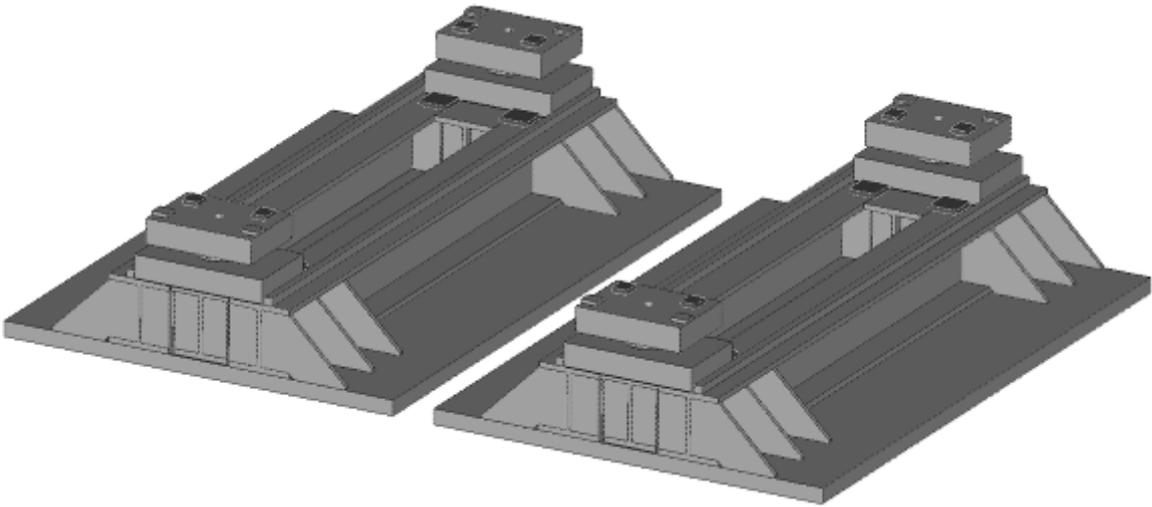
The structure of the supporting structure under the traverse of the excavator
